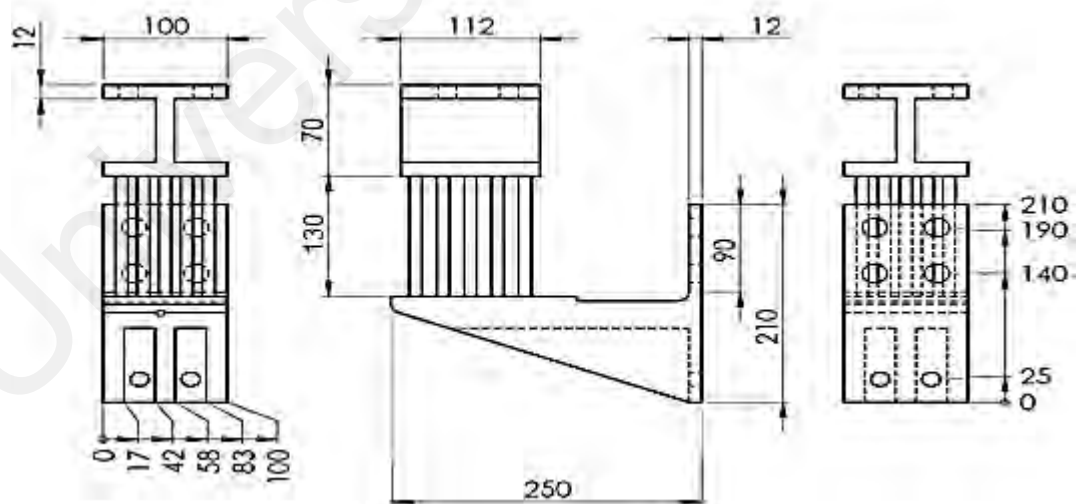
Detailed dimensions of the BD installed to in the test frame (units: mm)
